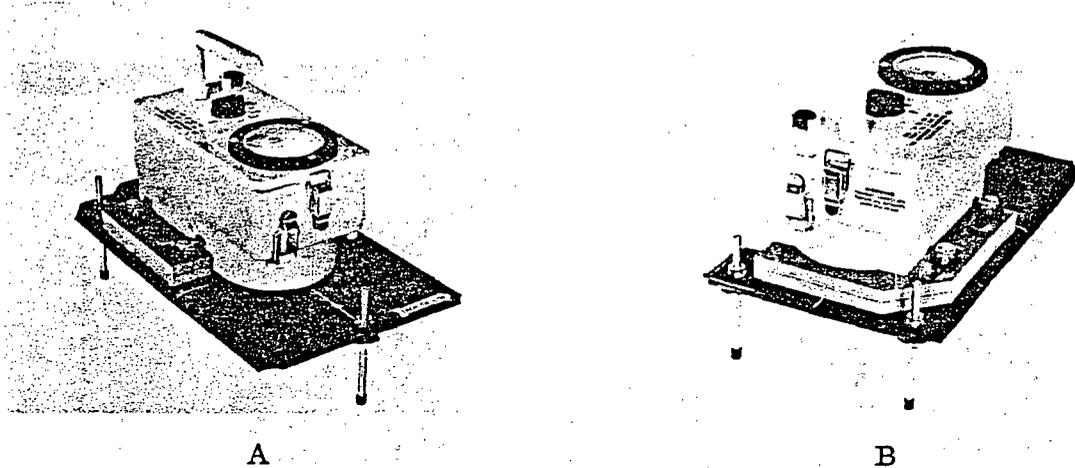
Centering Instrument Chamber on Universal Fixture
